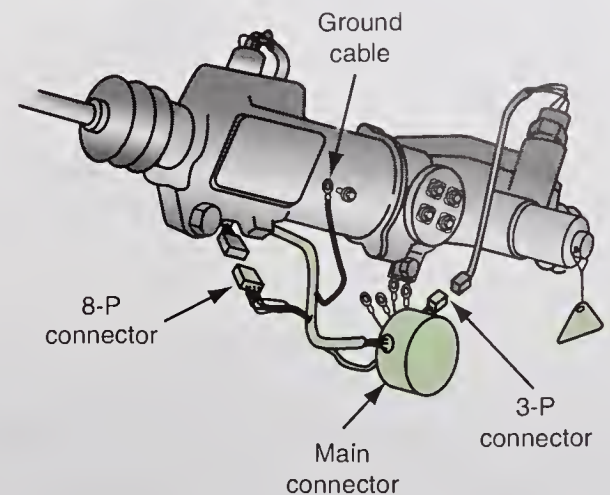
Installing wiring connectors on the rear steering actuator.
